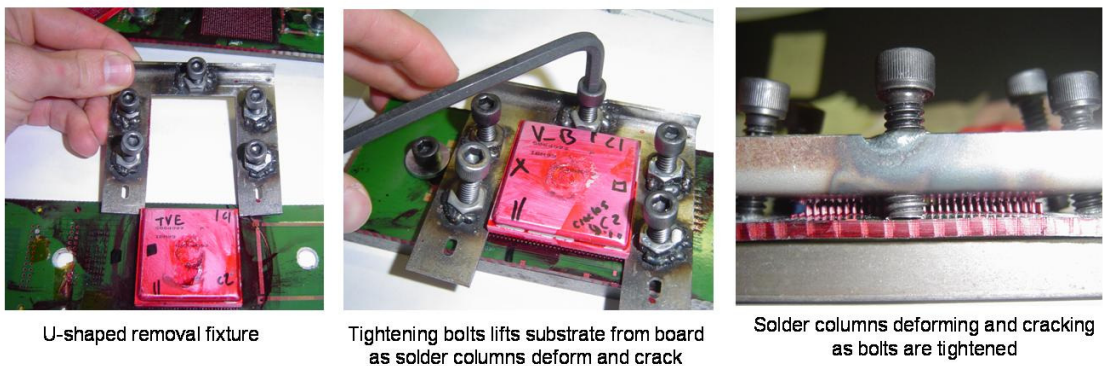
Special removal fixture to remove substrate from board for dye-n-pry analysis
